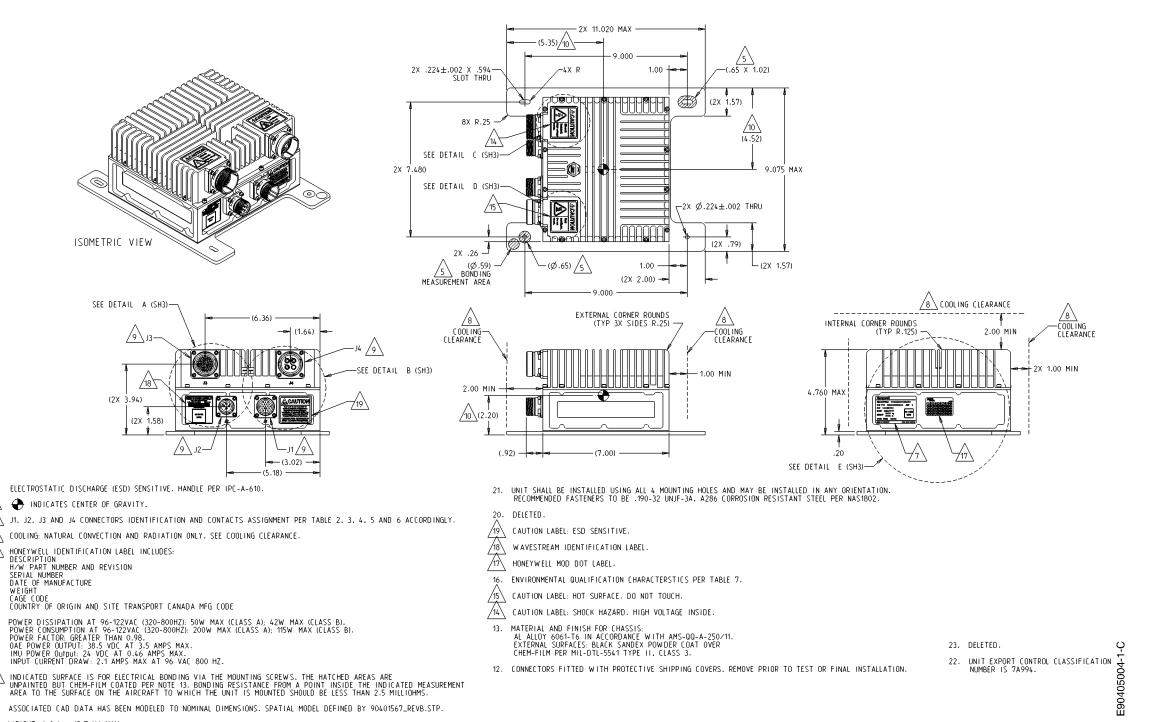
(Sheet 1 of 3) KANDU Variant 2 Outline and Installation Drawing (90405004, REV C)
